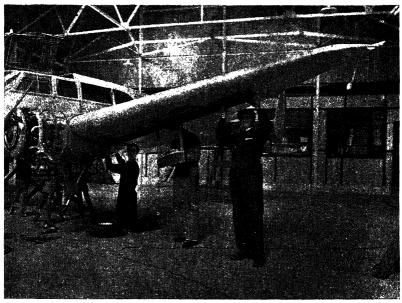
CHECK RIGGING DIMENSIONS (5). Checking dihedral angle of wings.
